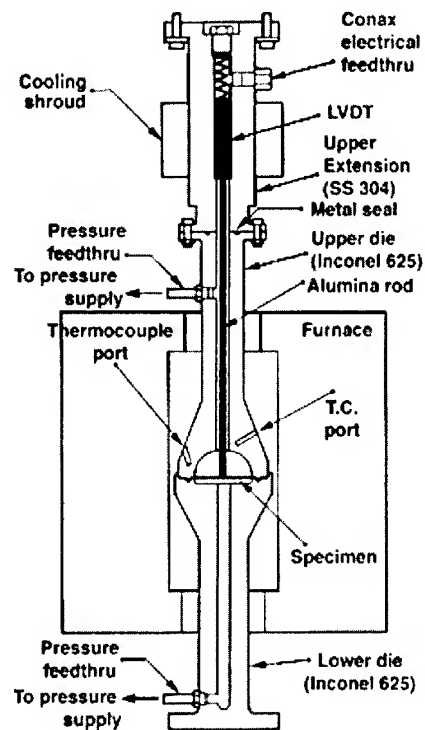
Die assembly of the superplastic forming apparatus using gas pressure
